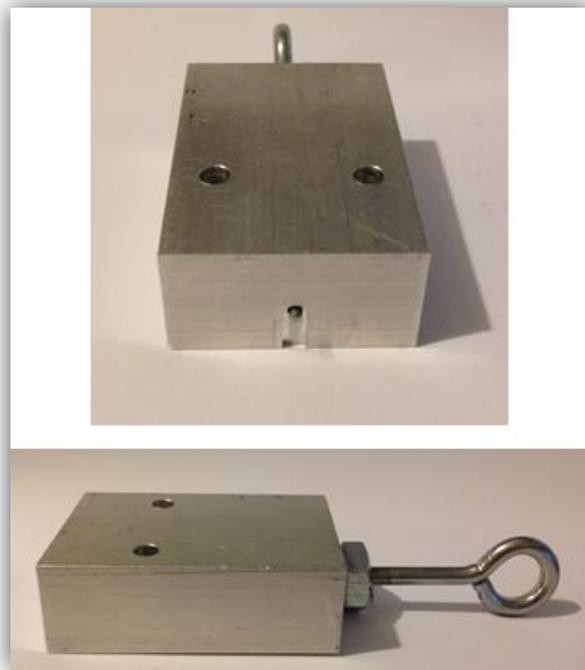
Fully Assembled Firing Mechanism: Front View of Primer Groove (Top), Side View with Hitch Pin in Place . Courtesy of A. Shukitis taken September 2013 in Tampa, FL
